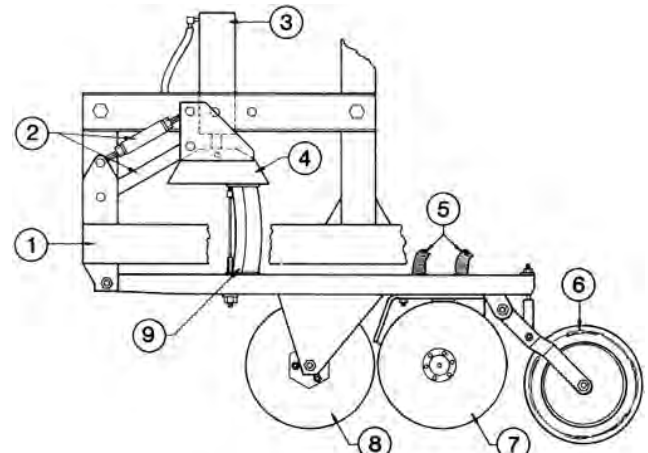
Triple Disk Opener: (1) Main Frame, (2) Parallel Linkage, (3) Hydraulic Cylinder, (4) Pressure Beam, (5) Delivery Tubes, (6) Gauge-Press Wheel, (7) Double Disk Opener, (8) Cutting Coulter, (9) Rubber Buffer.
